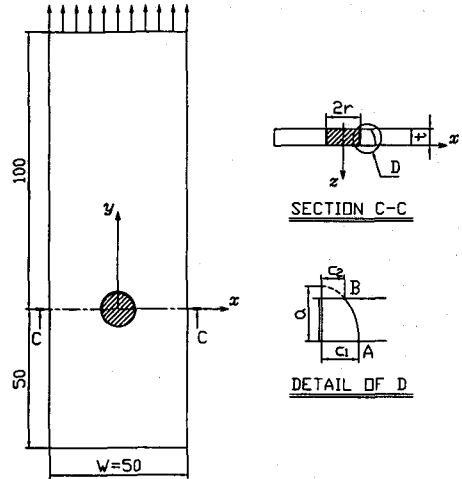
Configuration of an elliptical arc through crack at mechanical fastener holes
